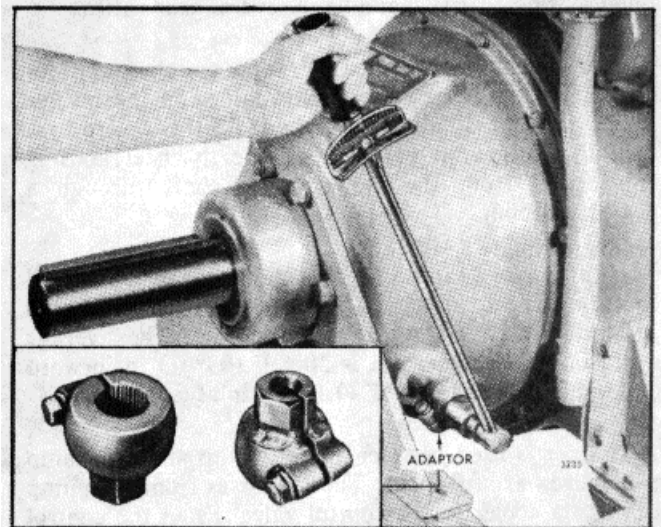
Checking Power Take-Off Clutch Adjustment with Torque Wrench and Adaptor
